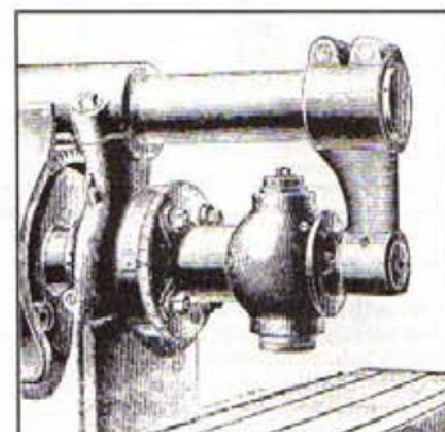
Brown and Sharpe vertical head attachment, 1879.
